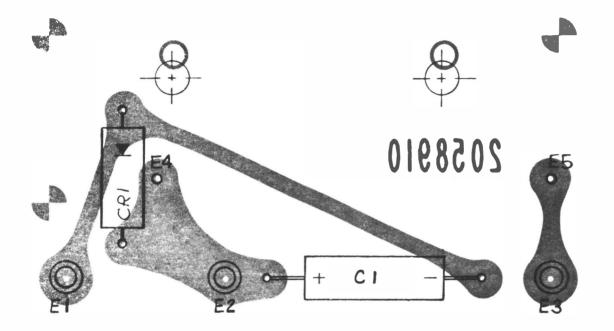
Transmitter IF. Filter Assembly 2A2A15, Component Location
